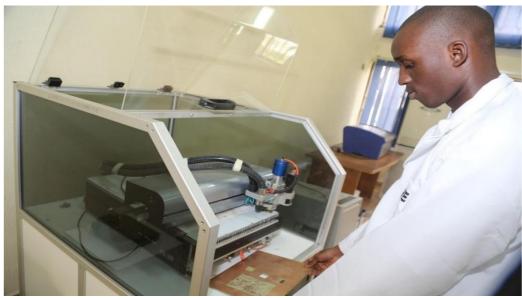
Printed Circuit Board Machine in the Digital System and Prototyping (Printed Circuit Board) Laboratory
